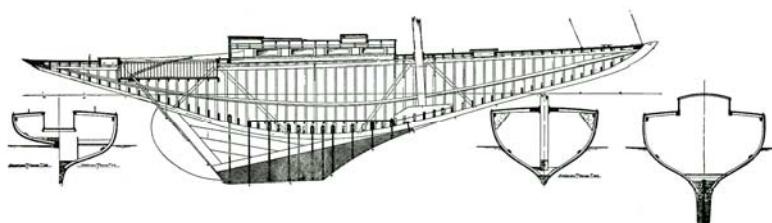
Mixed construction of steel frames , knees, floors etc and wooden hull and deck
